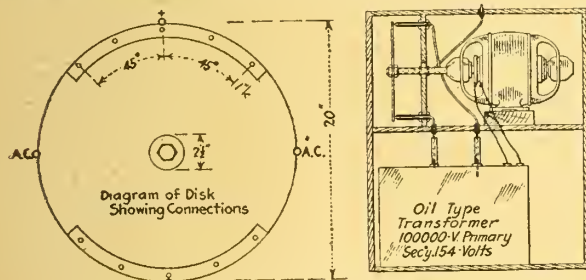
SMALL RECTIFYING OUTFIT, SHOWING ROTARY CONVERTER, RECTIFYING SWITCH AND TRANSFORMER.
